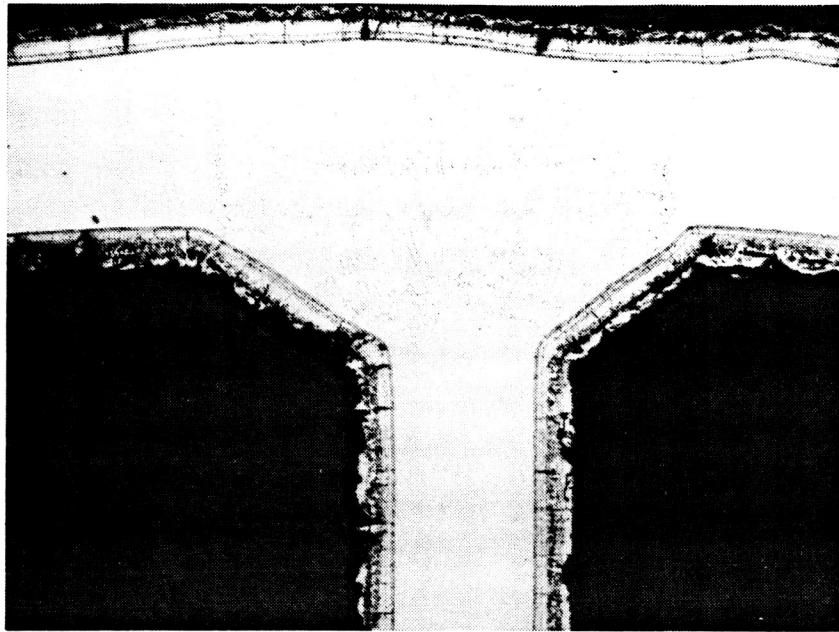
Cb-752/R-512E Electron Beam Weld on Sub-size Tee-Stiffened Panel (Photo D2741)
